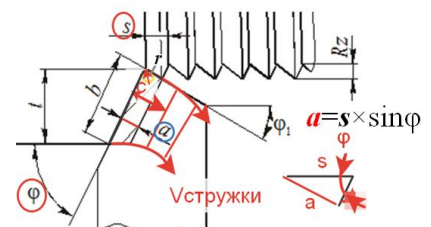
1. Basic parameters of turning tool geometry and top view of cutting mode in non-free oblique cutting
